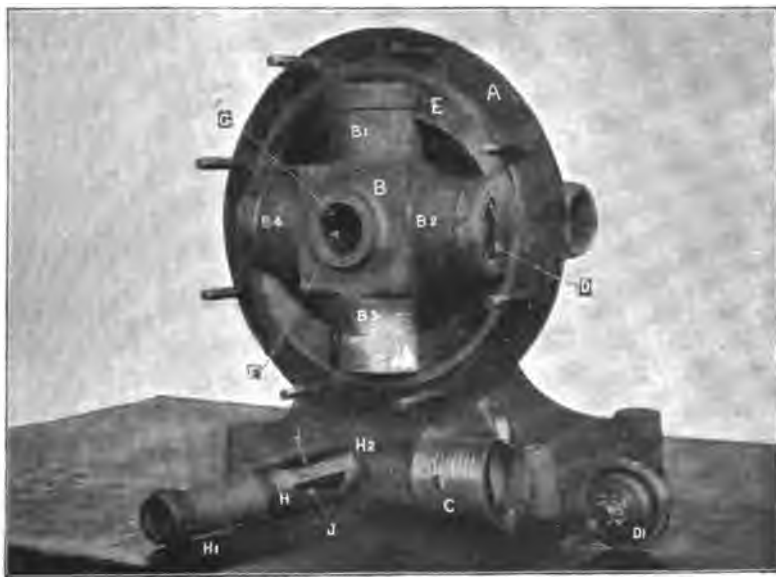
VIEW OF LJUNGSTRÖM CRANKLESS ENGINE, WITH CASING REMOVED.
